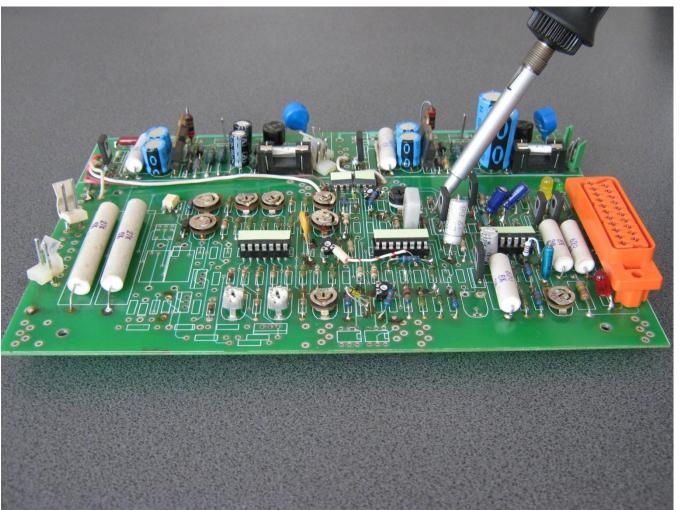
Soldering of terminal pads on the connection side of a PCB of an experimental supply source
